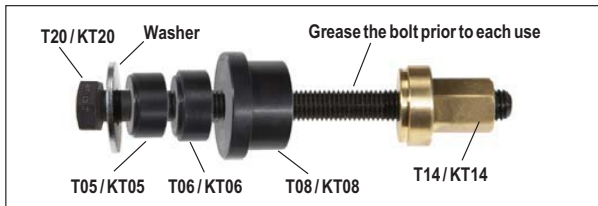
SHORT GUIDE PIN BUSHING INSTALLATION TOOL
